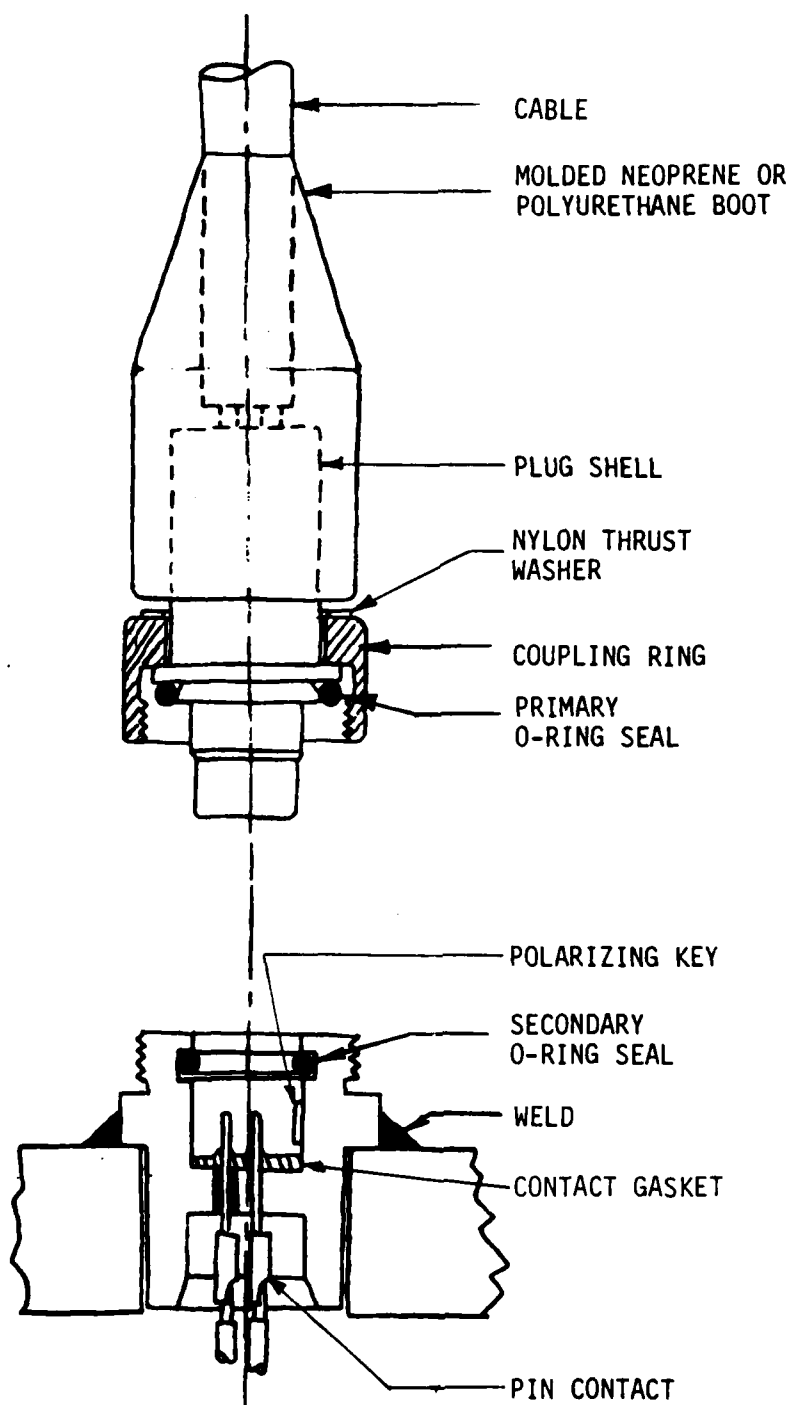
MIL-C-24217 CONNECTOR ASSEMBLY
